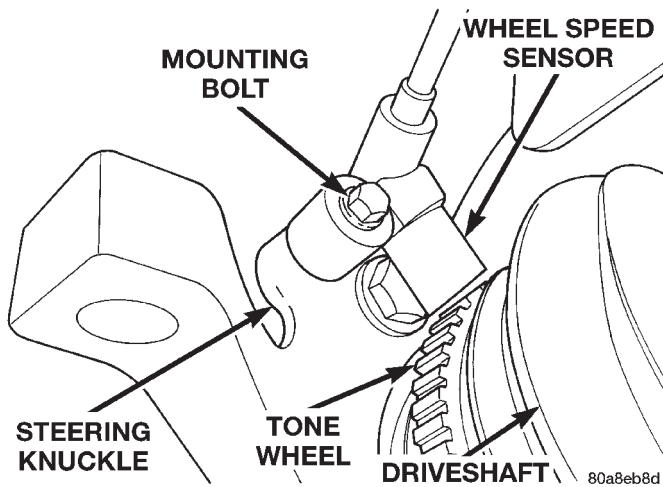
Front Wheel Speed Sensor Attaching Bolt
